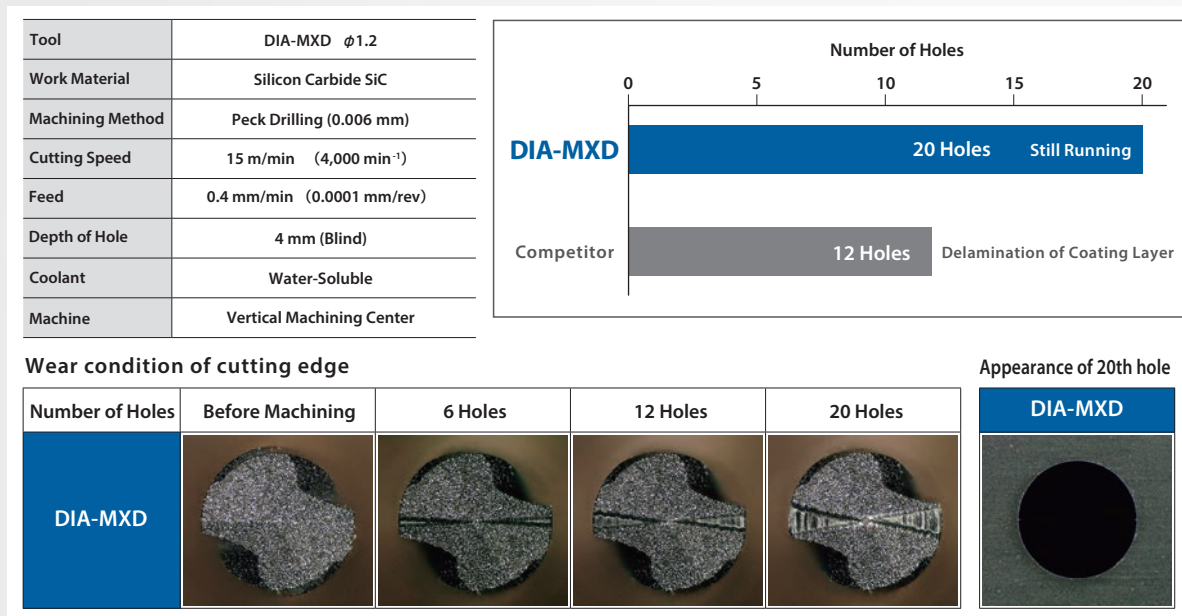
Cutting example in silicon carbide (SiC) using a 1.2 mm diameter drill at a hole depth of 4 mm.
